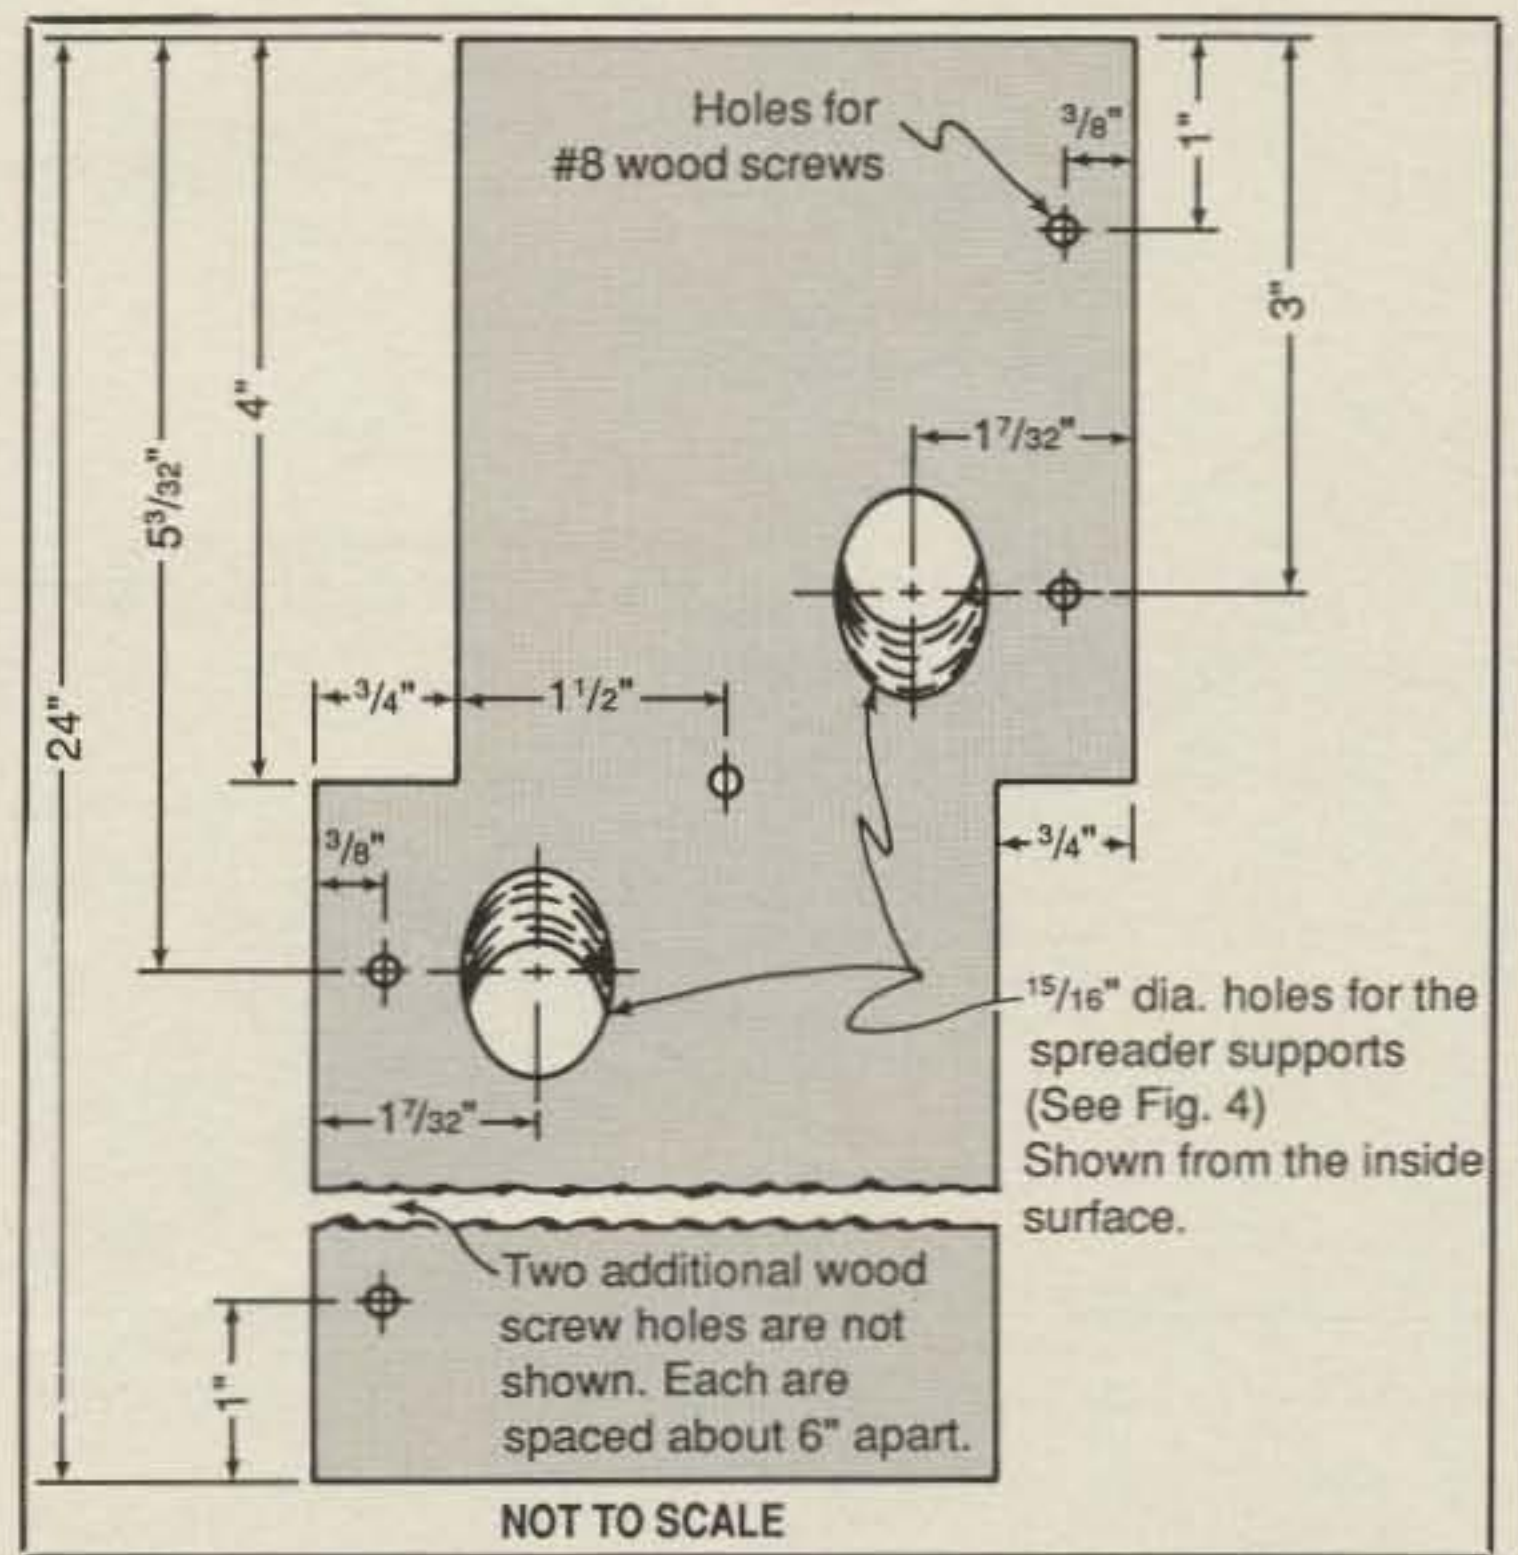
A cutting and drilling guide for one of the four sides of the center support. The U-bolt holes are drilled in only one of the four pieces.
